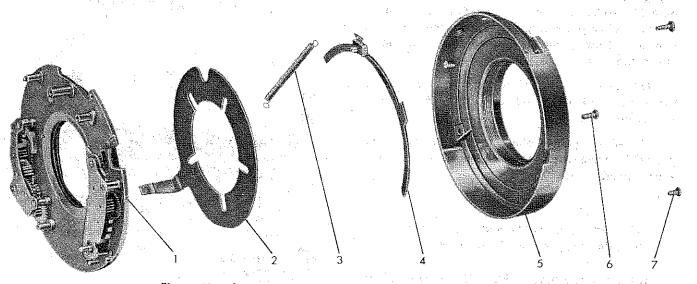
Shutter Mechanism Plate Complete, Exploded from Case
